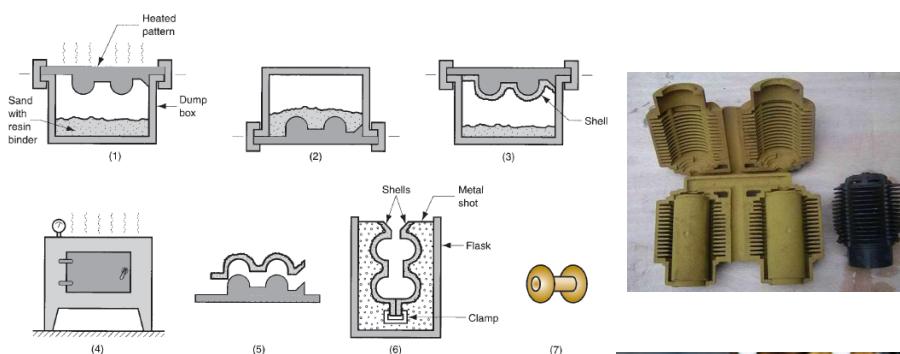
Steps in shell-molding: (1) a match-plate or cope-and-drag metal pattern is heated and placed over a box containing sand mixed with thermosetting resin; (2) box is inverted so that sand and resin fall onto the hot pattern, causing a layer of the mixture to partially cure on the surface to form a hard shell; (3) box is repositioned so that loose, uncured particles drop away; (4) sand shell is heated in oven for several minutes to complete curing; (5) shell mold is stripped from the pattern; (6) two halves of the shell mold are assembled, supported by sand or metal shot in a box, and pouring is accomplished. The finished casting with sprue removed is shown in (7).
